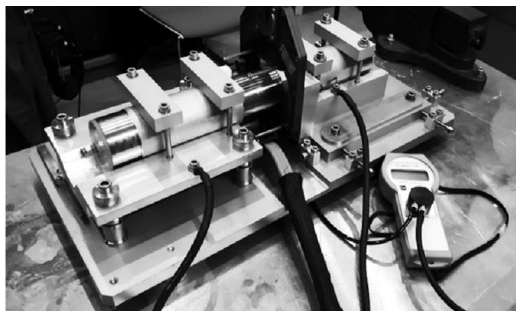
Fixture with controlled misalignment mechanism used for divertor cooling pipe welding trials [98]
